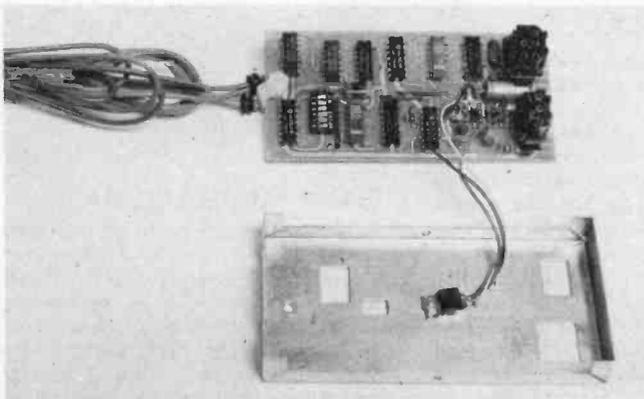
The Display Unit p.c.b. viewed from component side. The external-connection solder pads at r.h. edge are on the underside of the board.
